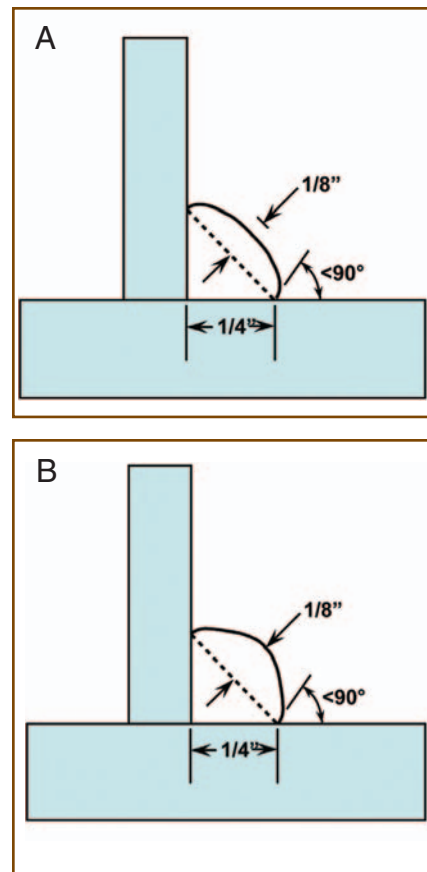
1/4-in. fillet welds with acceptable convexity per AWS D1.1.
